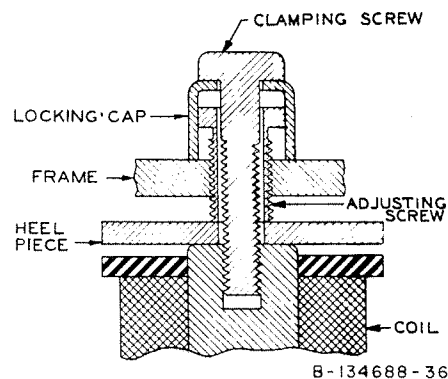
Vertical Magnet Clamping Screw and Associated Parts
